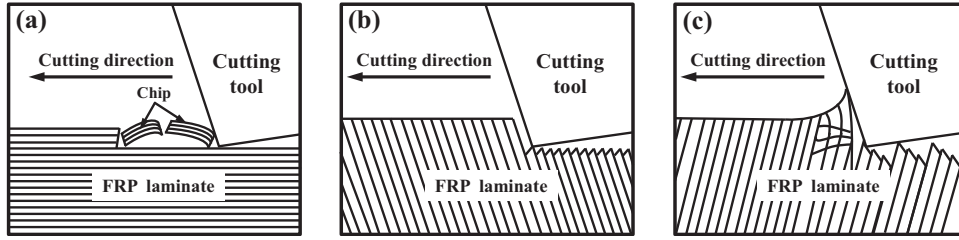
Scheme of the chip formation mechanisms in FRP laminate cutting: (a) layered peeling fracture; (b) extrusion shear fracture and (c) bending shear fracture [54].
